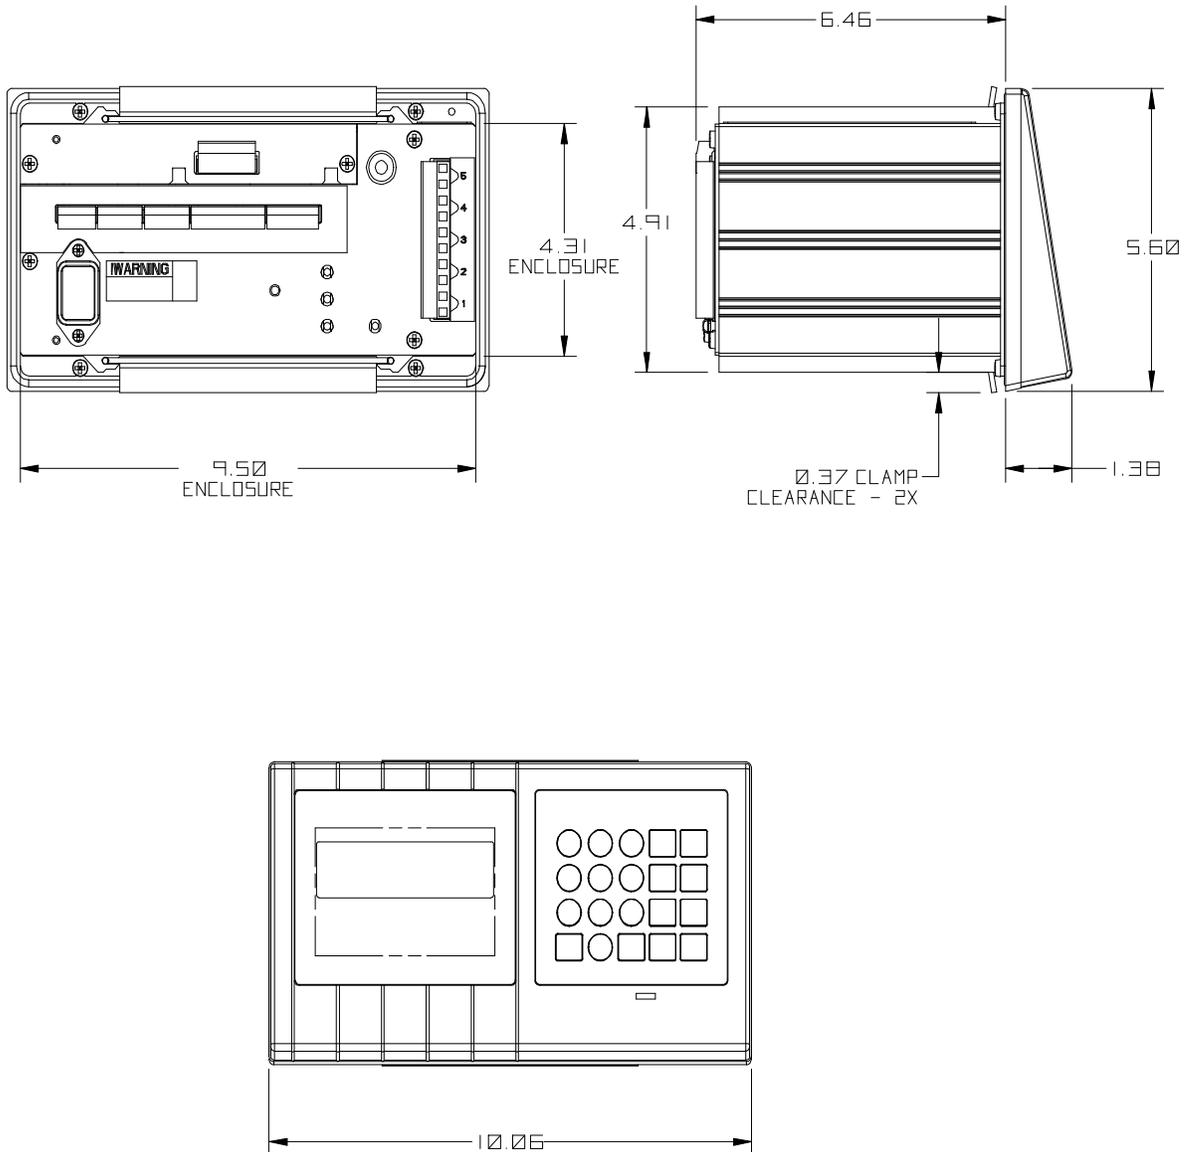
LYNXBATCH Panel Mount Dimensions
